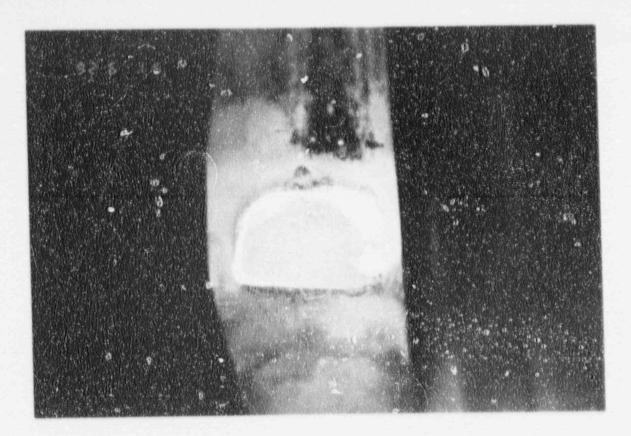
NOR? H SIDE SKIRT RAIL DAMAGE
